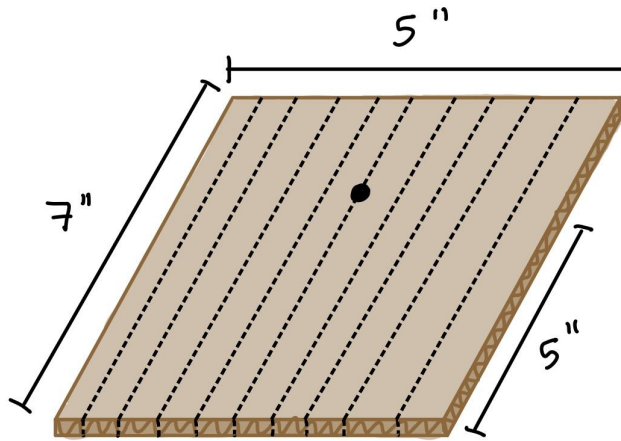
Scored 5" by 7" cardboard sheet with hole 5" from bottom of 7" side
